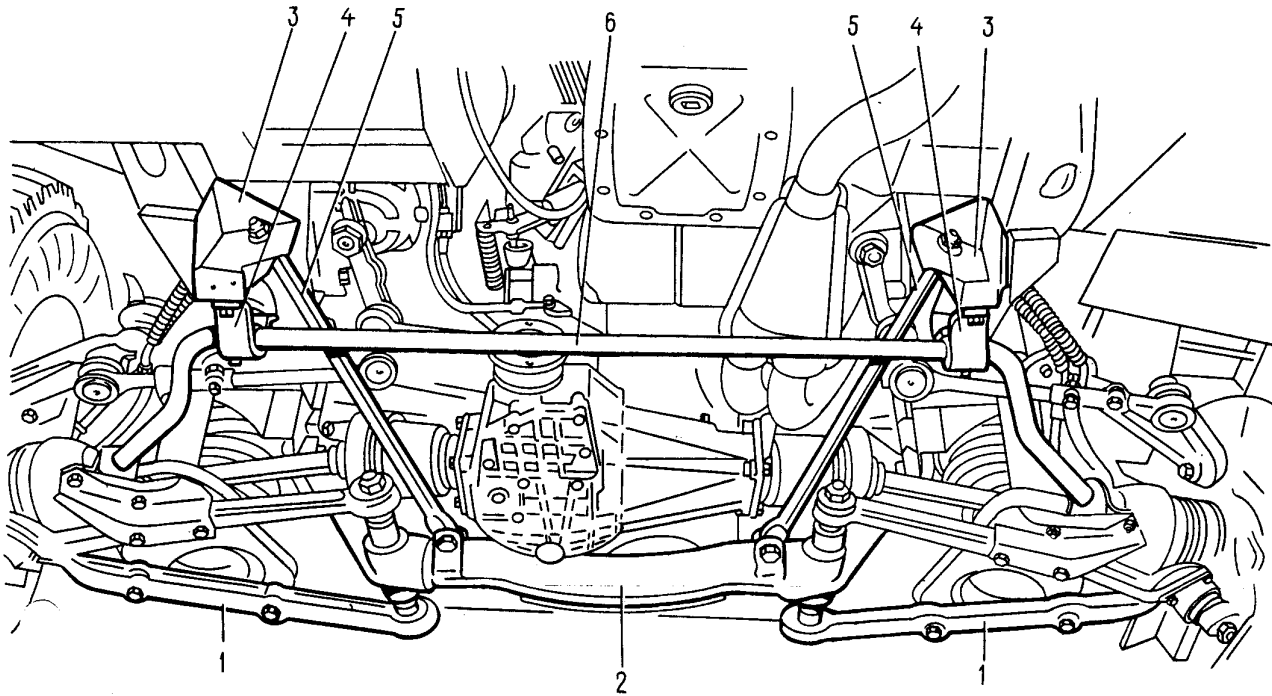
Front Suspension Mounted on Car. Rear View:
